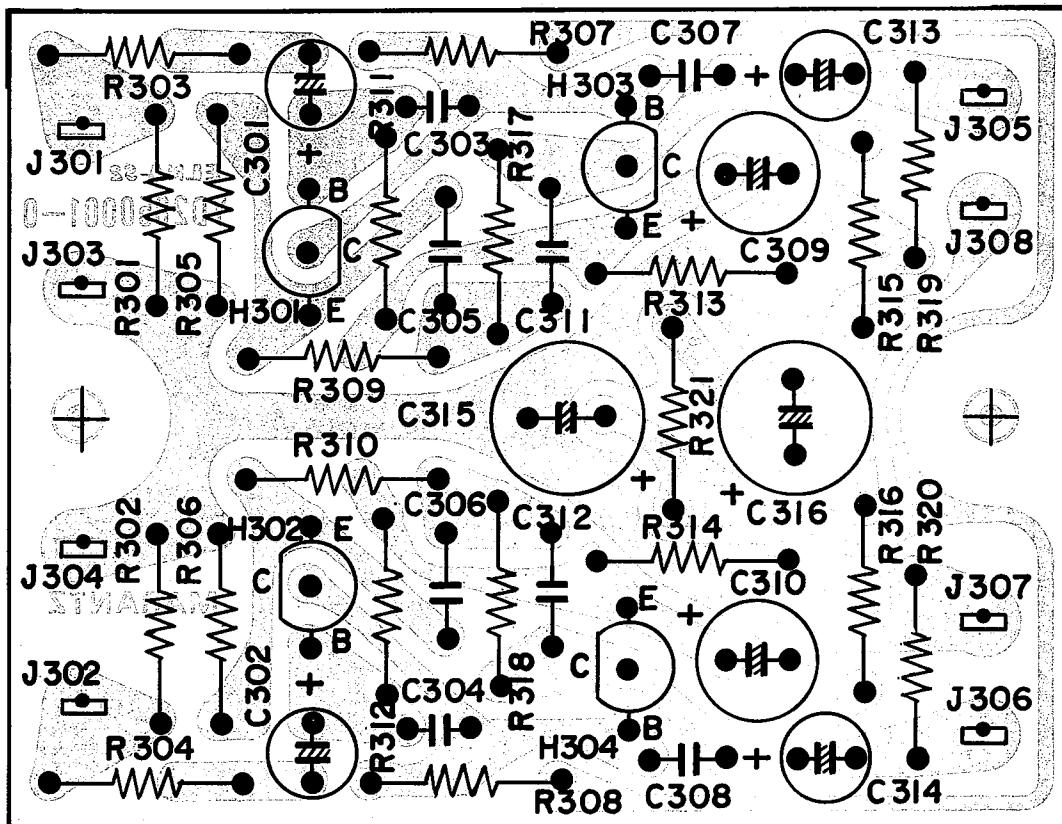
Phono Equalizer Amplifier Assembly P300 Component Locations
